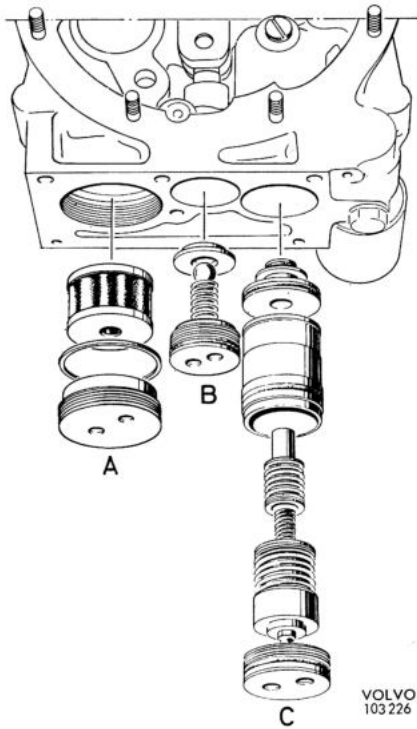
Fitting the fine filter, oil pump check valve and relief valve
